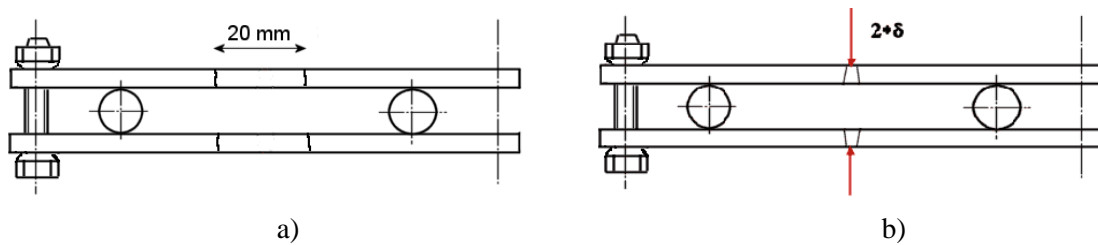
Loading geometry with displacement measurement location indicated by two red arrows of pure weld metal (a) and dissimilar weld metal mock-up (b) samples.
